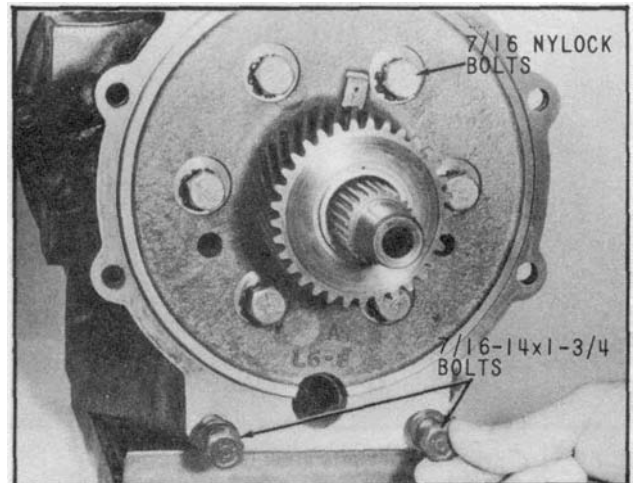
Removing the Two 7/16 inch Bolts After Tightening the 6 Nylock Bolts
